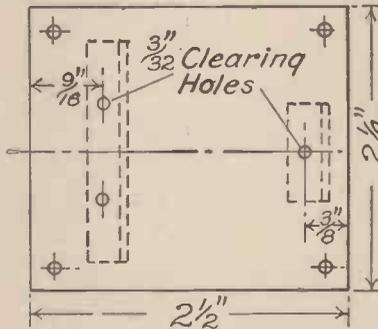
A plan of the baseplate showing the position of the holes for fixing screws.
